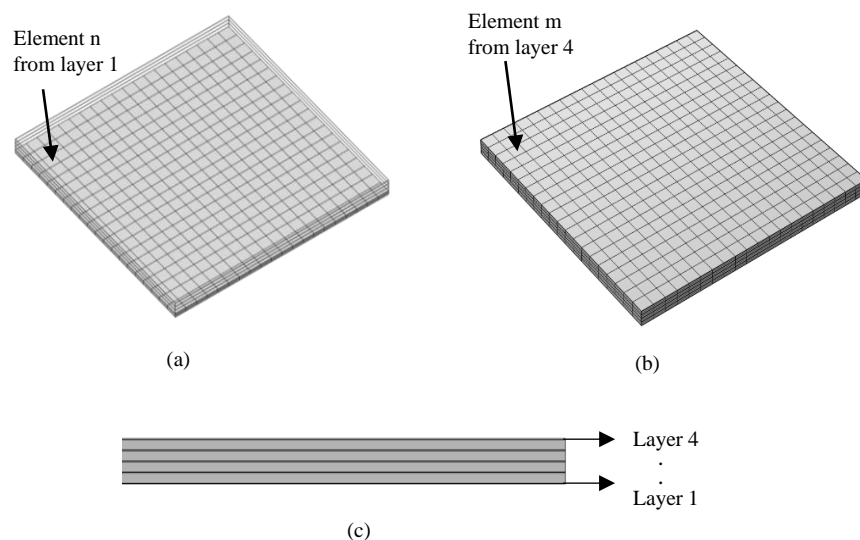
(a) Iso-metric view and location of element n in the printed part (b) Location of element m in the printed part (c) Side view of the printed part representing the layer sequence
